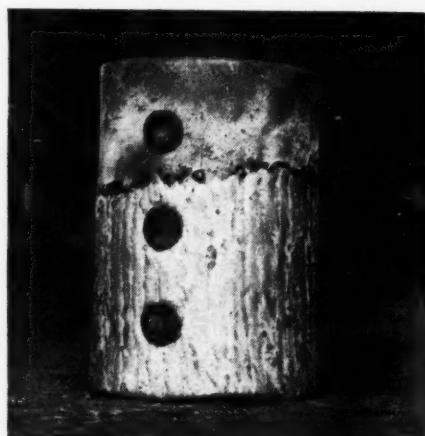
Conveyor-belt idler pulley after selective building up by welding.
